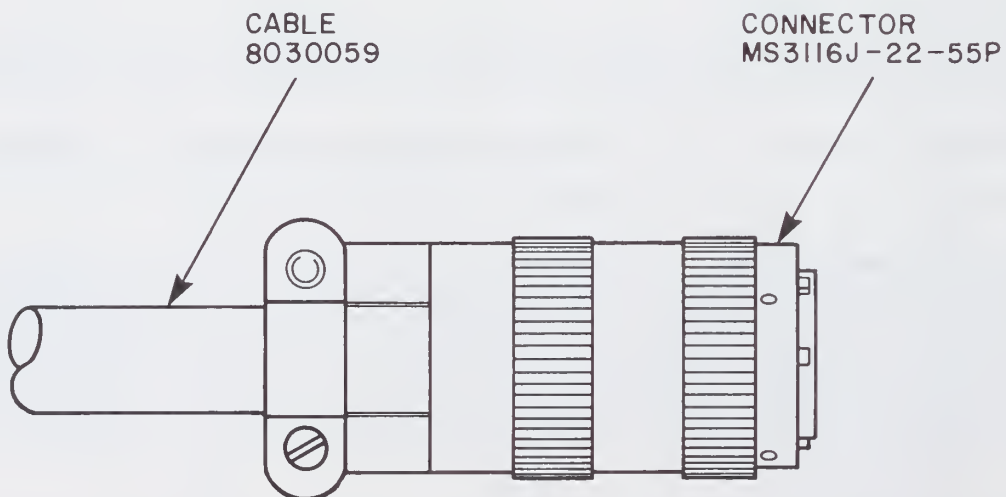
Connector Assembly, WSR-74 Data Cable
